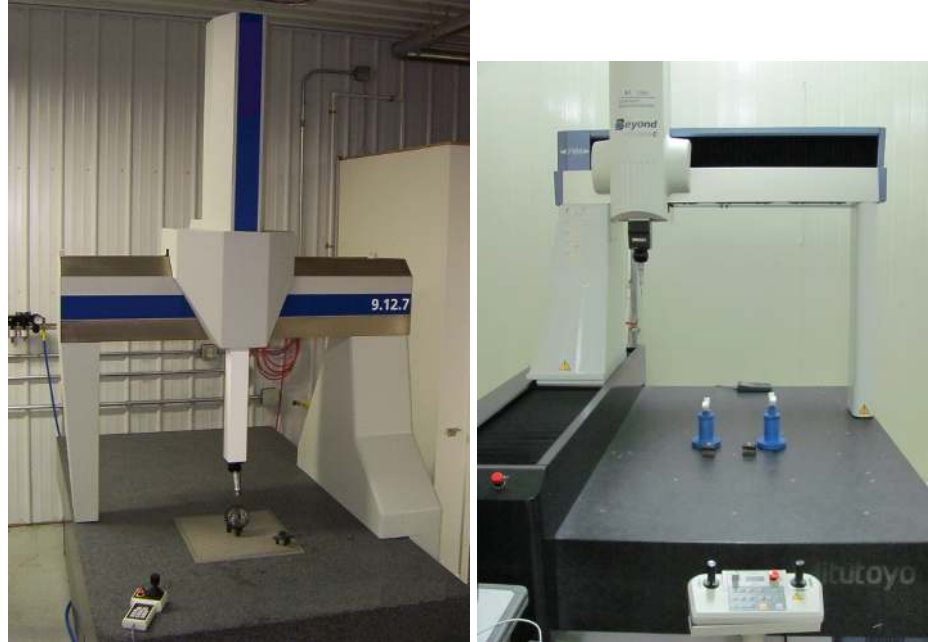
Contact 3D Scanners Example: Coordinate Measuring Machine [6]
